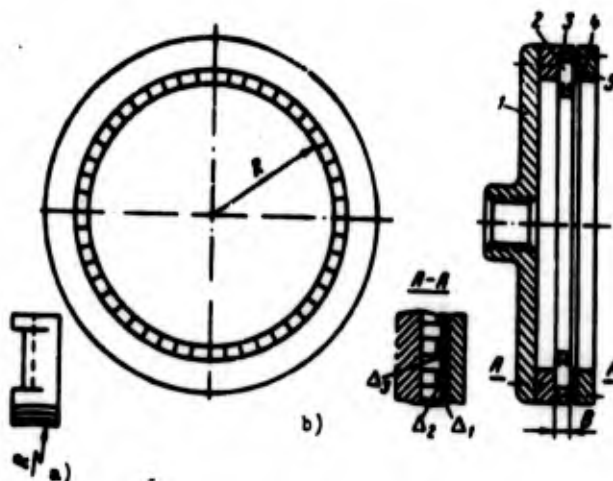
Treatment of the root of blades: 1 - face plate; 2 - set of blades to be treated; 3 - casing of the device; 4 - clamping ring; 5 - packing.
